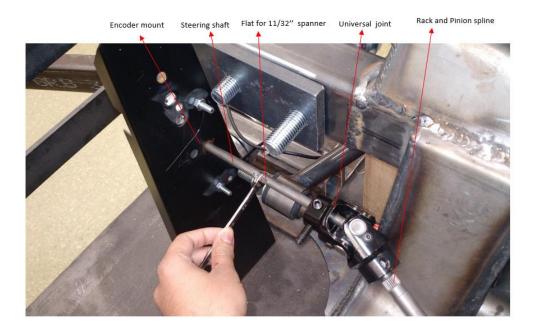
Mounting of the encoder and joints to the rack and pinion
